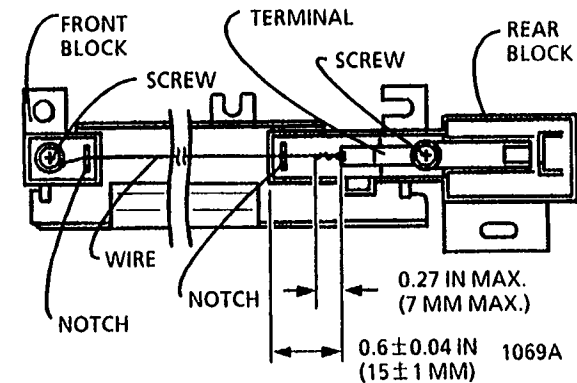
Threading and Tensioning the Transfer Corotron Wire
